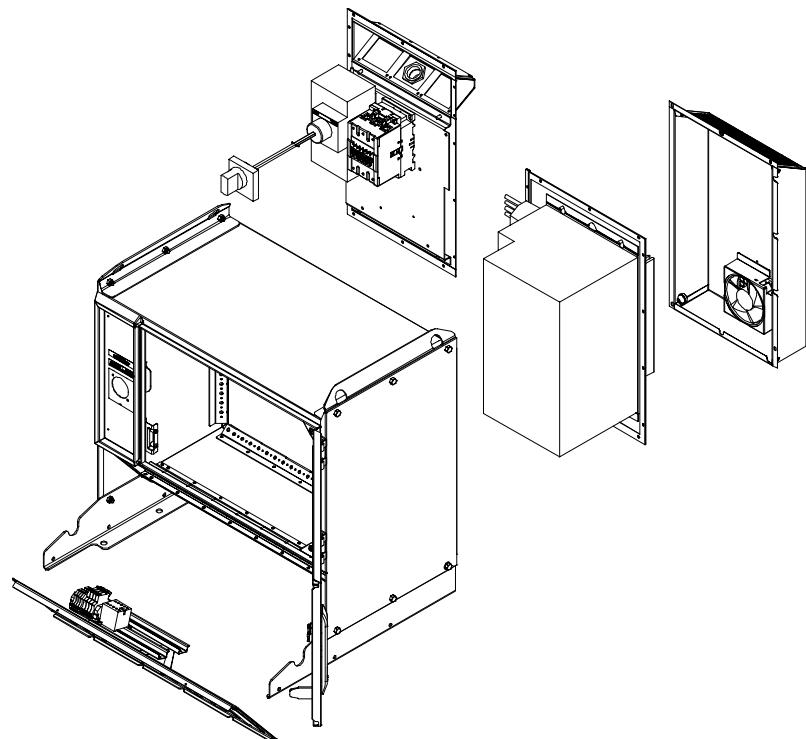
Exploded view drawing of the Spot Welding cabinet.
